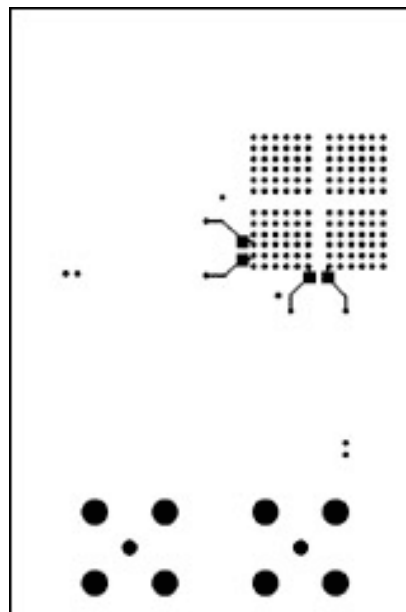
DS3151 Single-Port, T3/E3 LIU Layout—Copper Layer (view mirrored)
